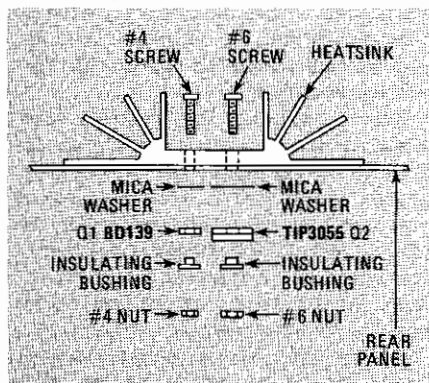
ATTACH Q1 AND Q2 to the rear panel and the heatsink as shown here. Use heatsink grease on all mating surfaces.
